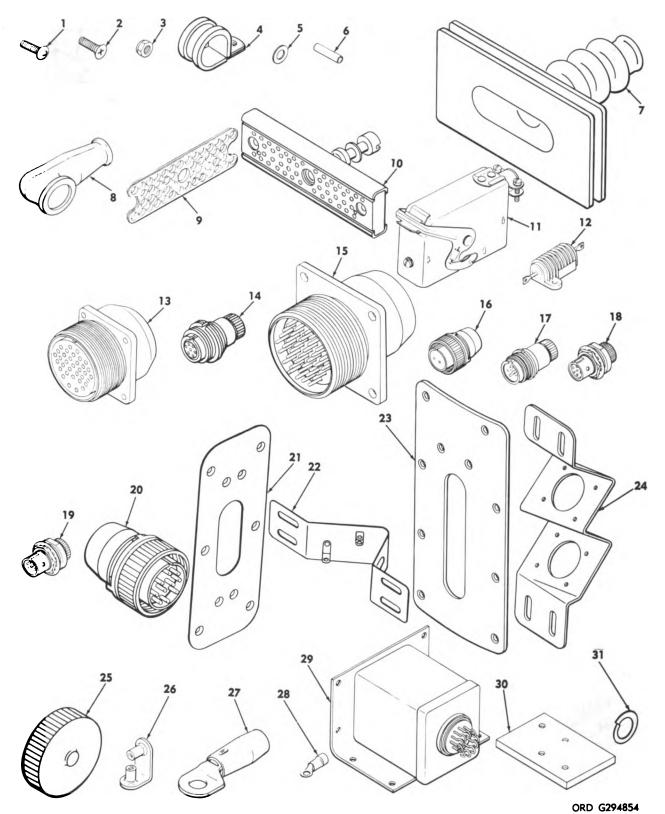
WIRING HARNESSES AND CABLE ASSEMBLIES
